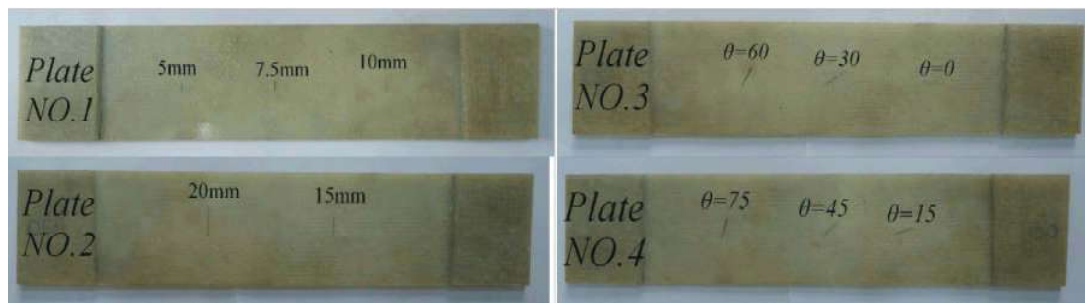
Composite laminates manufactured with several cut grooves. (a) Vertical cracks and (b) oblique cracks with different angles
